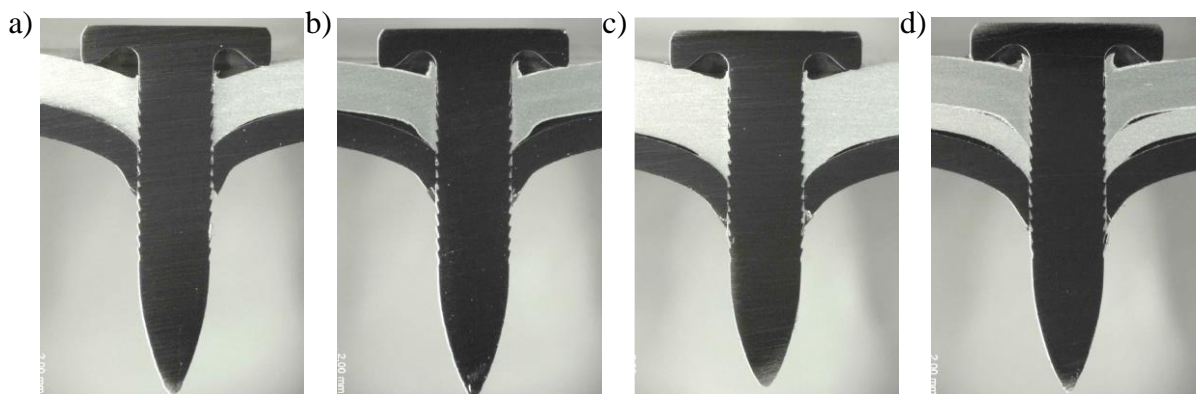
Cross section of the tack high speed joints for the: DP600GA – 2AA6061 (a); DP600GA – 2AA5754 (b); DP600GA – 1AA6061 – 2AA6061 (c); DP600GA – 1AA6061 – 2AA5754 (d);
